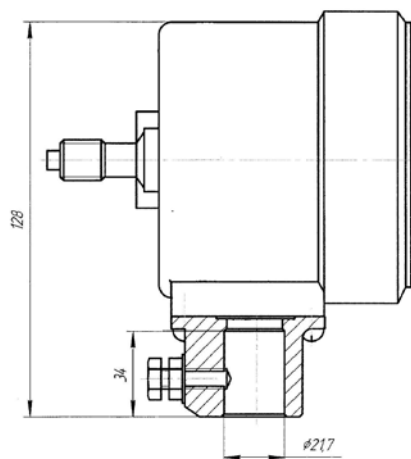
Overall and attachment dimensions of differential pressure gauge ДСП-80 ПАСКО with a bracket
